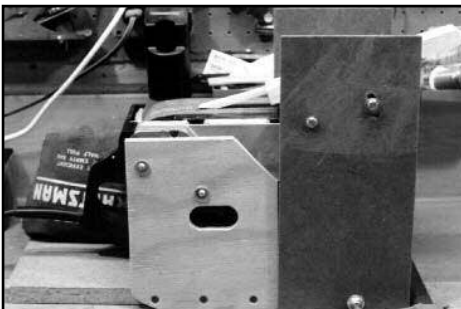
A jig built, using a belt sander and an adjustable guide, to taper pipe covers and pipe fronts.
